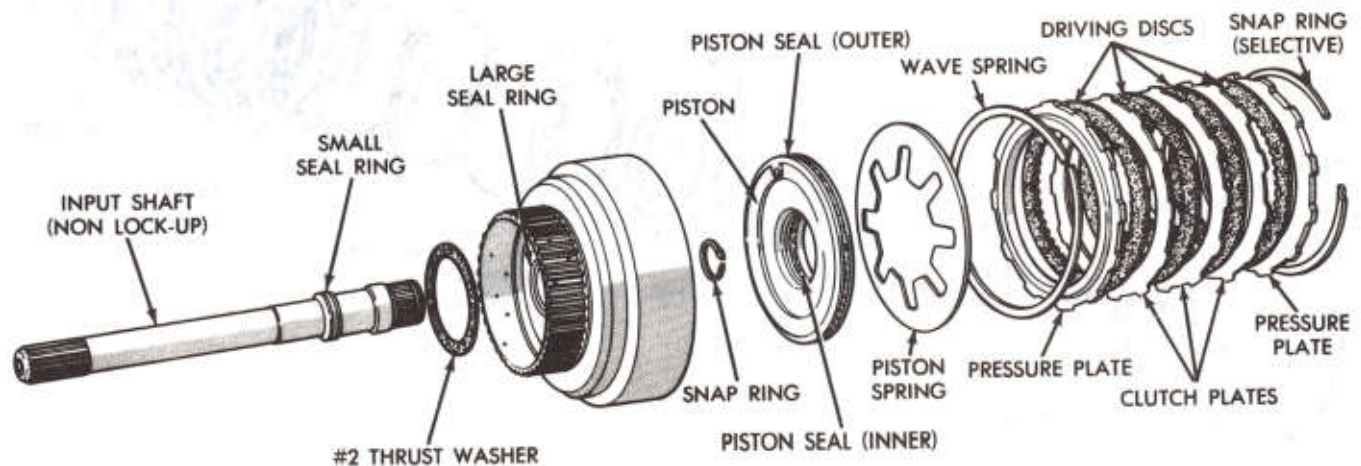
Rear Clutch (A-904T and A-999 Nonlockup)
